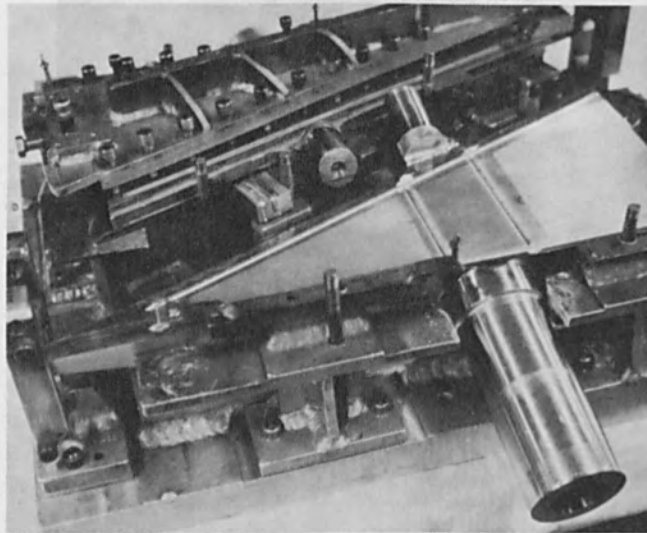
Weld holding fixture with one vane clamped in position and the second vane positioned in holding fixture.
